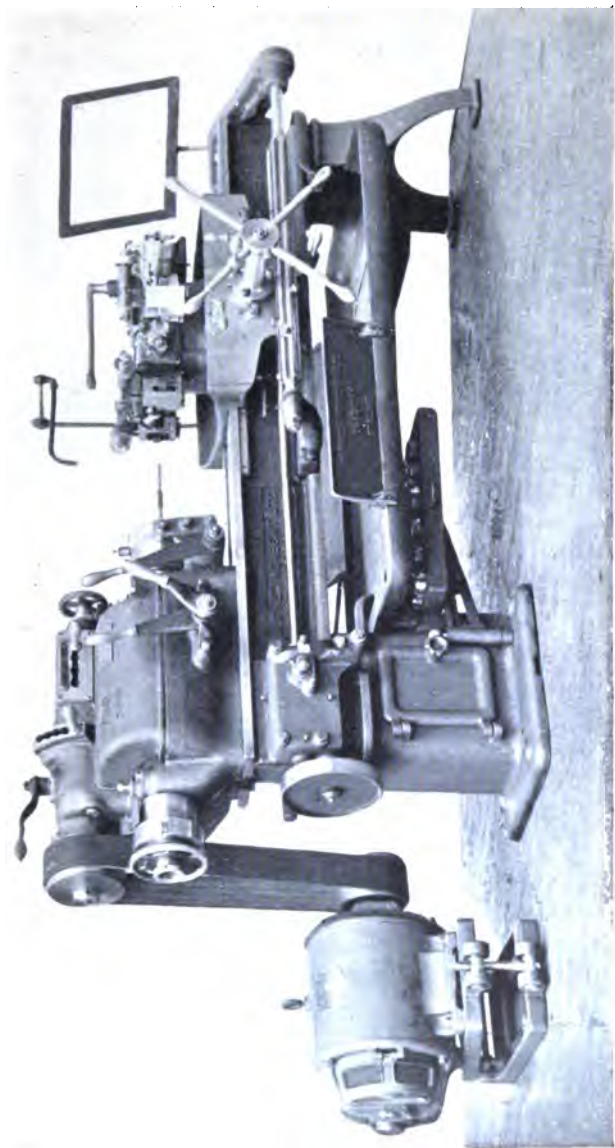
Hexagon Turret Lathe driven from Electric Motor through Belting.
